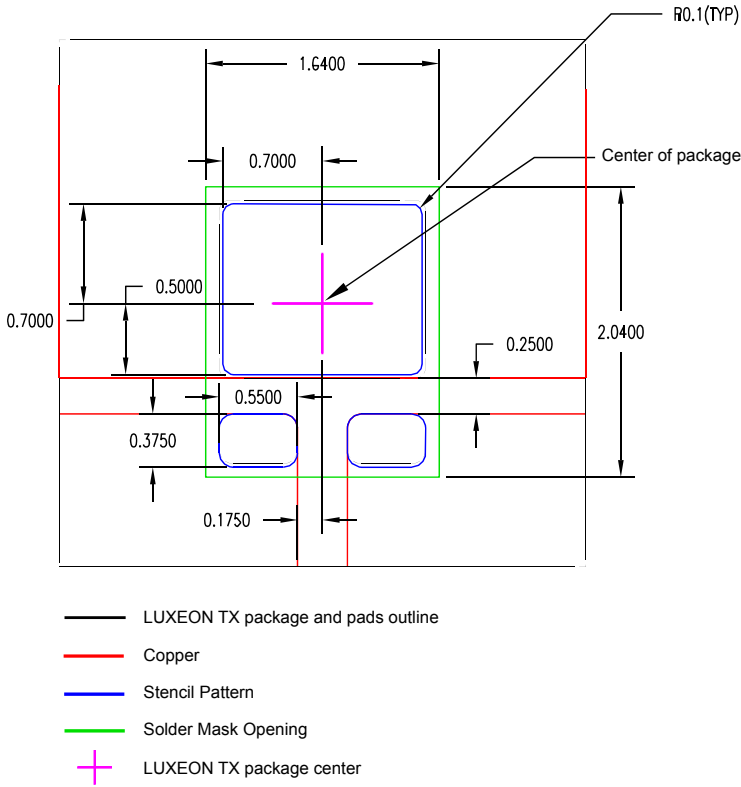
Recommended PCB solder pad layout for LUXEON TX.
